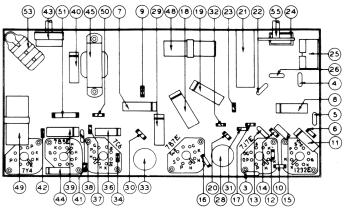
PART LOCATIONS, UNDERSIDE OF CHASSIS.
